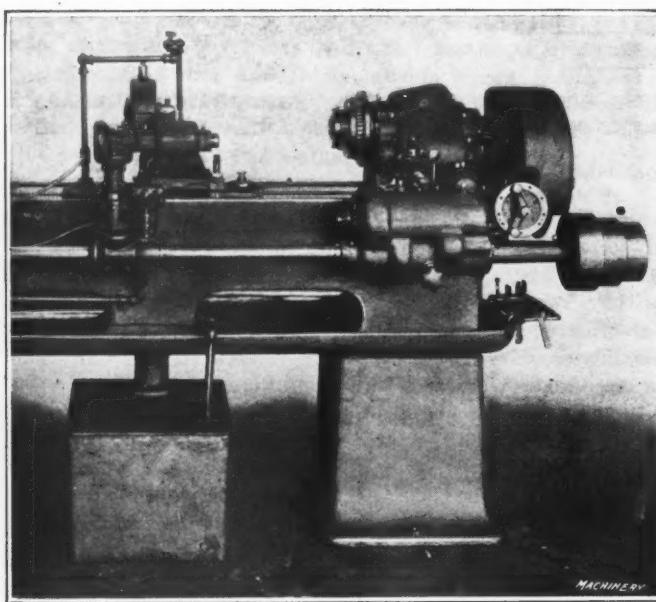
Rear View of Pratt & Whitney Thread Milling Machine
